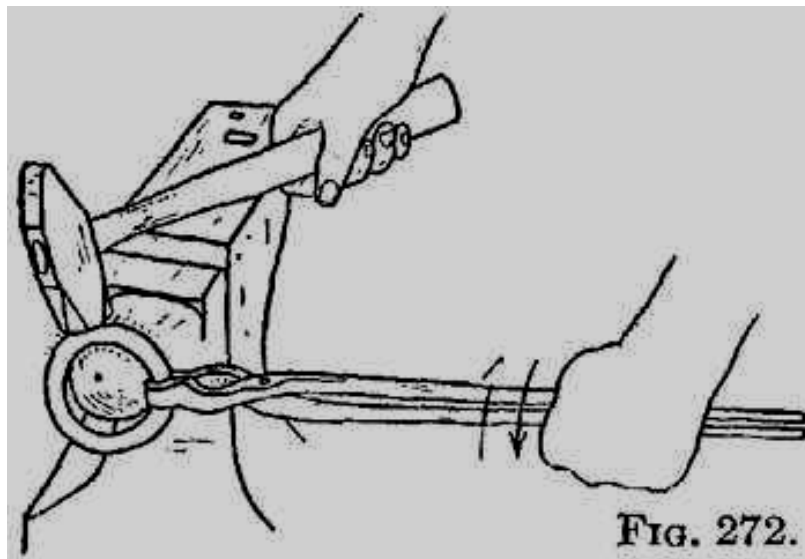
The weld on a link or ring should be finished by rolling it slowly on the horn while hammering with a series of rapid, light blows. Large rings may be finished by making the stock square, then eight-sided, and finally round.
